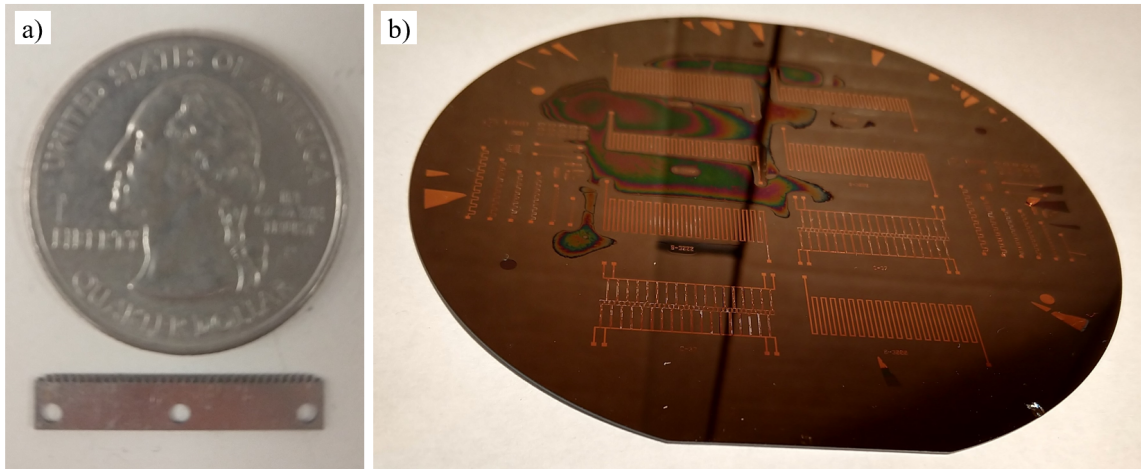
a) fabricated yoke next to a quarter. b) fabricated wafer ready for final yoke hole drilling step.
